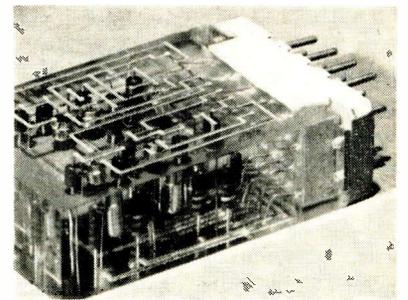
shows details of the connections used with the flip-flop with etched wiring. The unit is lightly sandblasted. An initial layer of copper is chemically deposited less than 20 microinches thick from solution (Cuposit III, Shipley Co., Wellesley, Mass.). The electroplated layer is about 0.001 inch thick. The layers are deposited on both faces of the unit and selectively etched to form the wiring.
